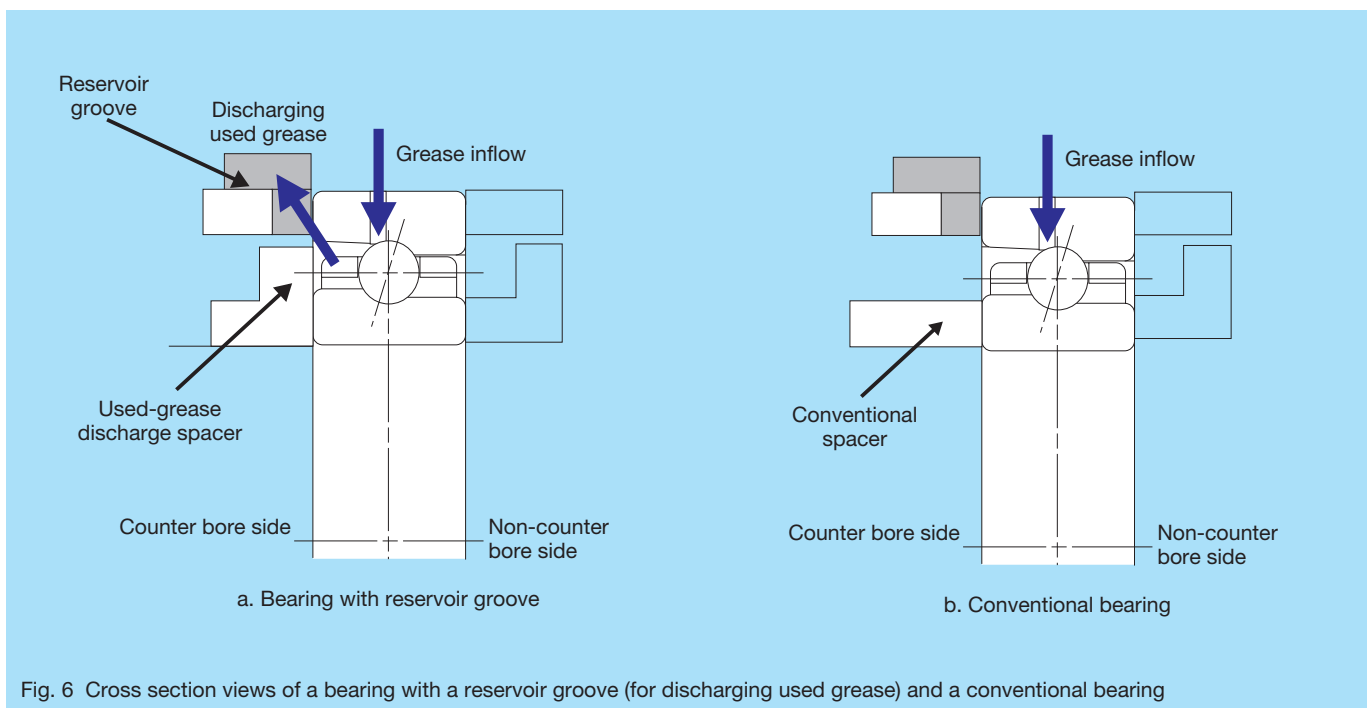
Cross section views of a bearing with a reservoir groove (for discharging used grease) and a conventional bearing
